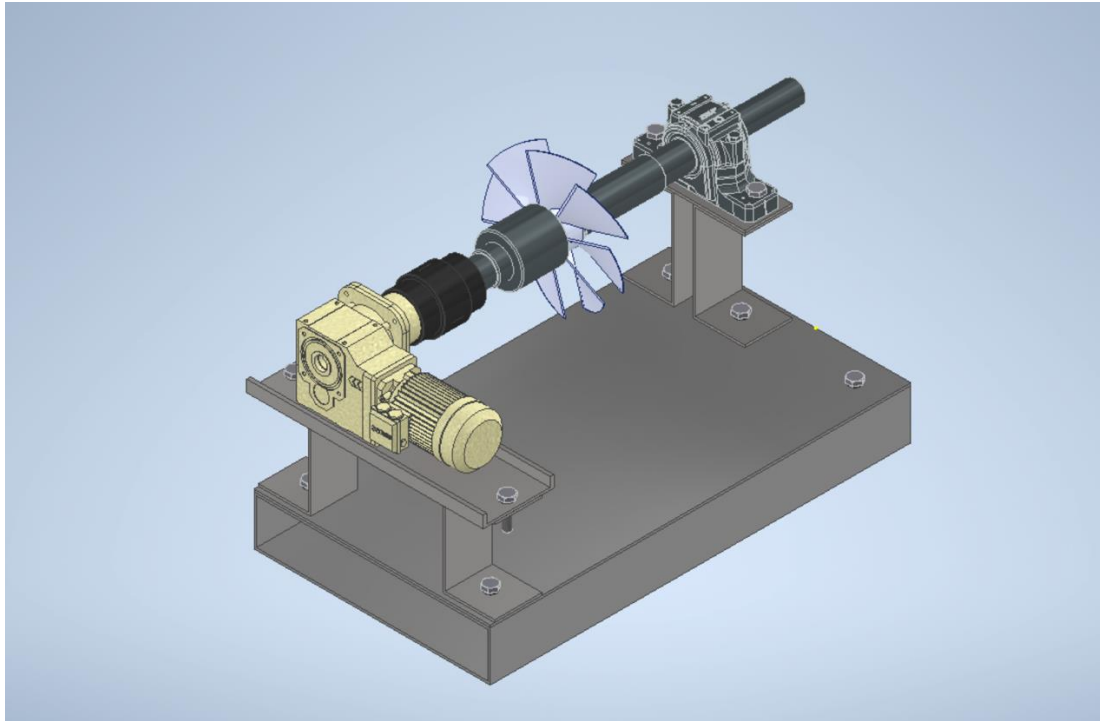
Inventor CAD model of the gear motor and shaft arrangement
